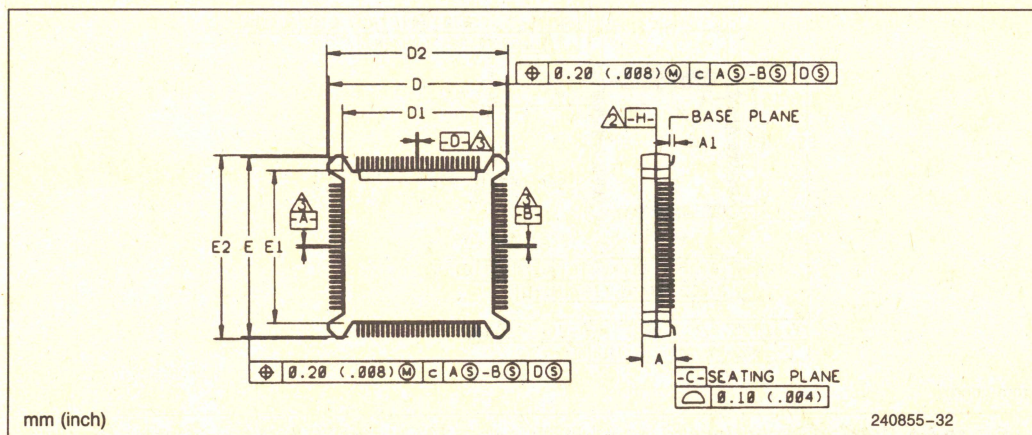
Principal Dimensions of the 82750DB in the 132-Lead PQFP Package
